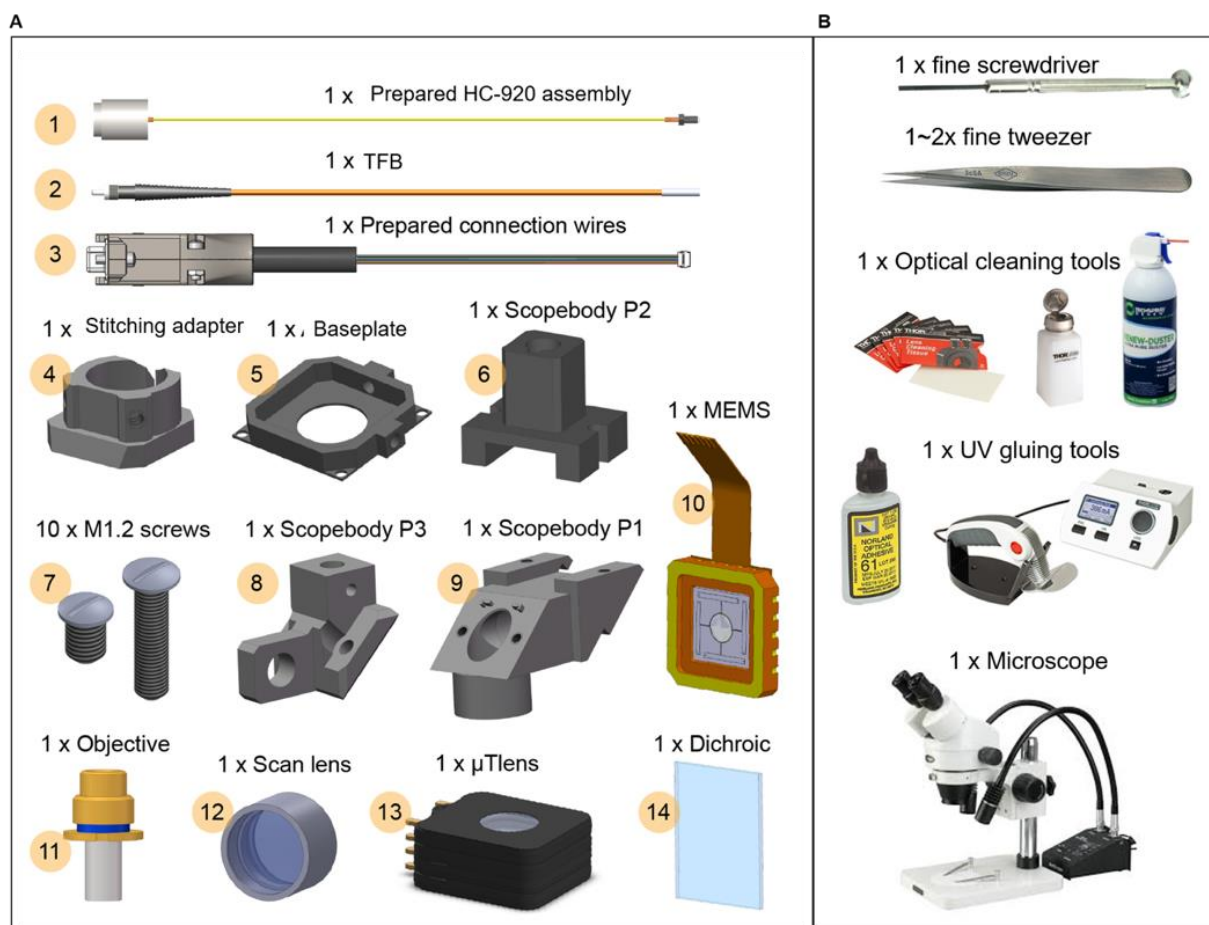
Taken from Fig.S10 in Zong et al, 2022: Schematic of (A) Optical and mechanical parts; (B) Reagents and tools for Mini2P assembling.
